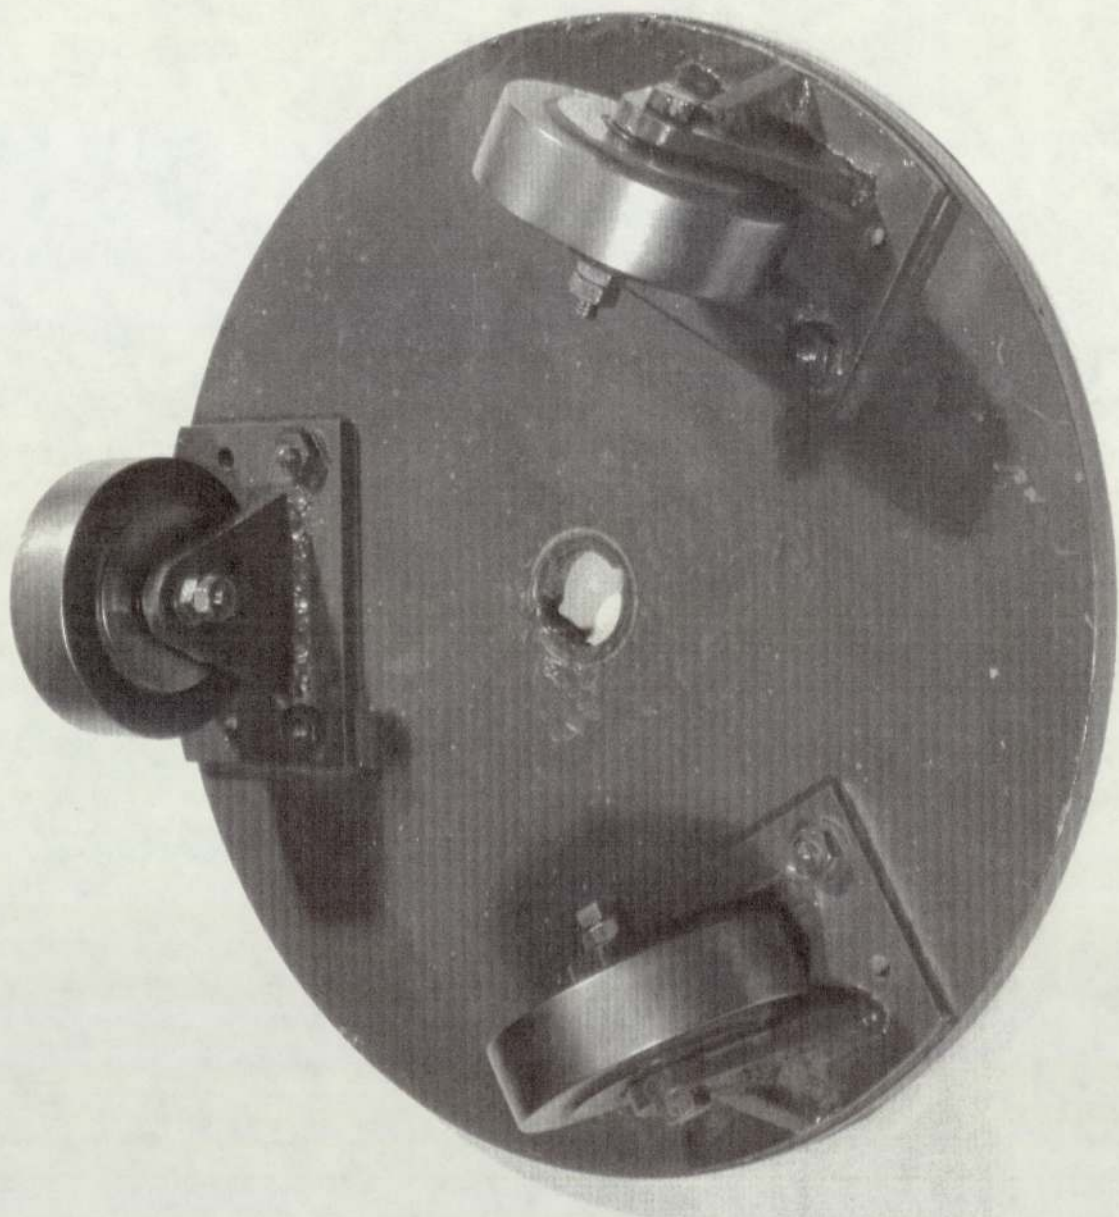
THE ROLLING WHEELS TYPE OF HEAD
